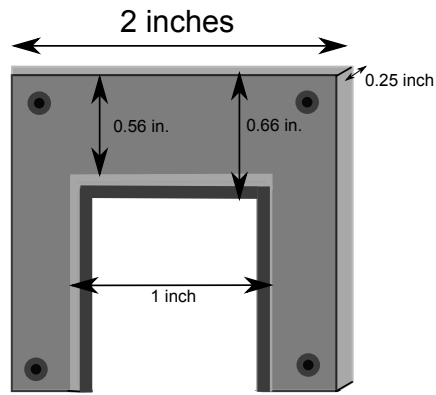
Every mount attaches to this “U” shaped holder that fits on the Aluminum block attached to the motorized stages.
